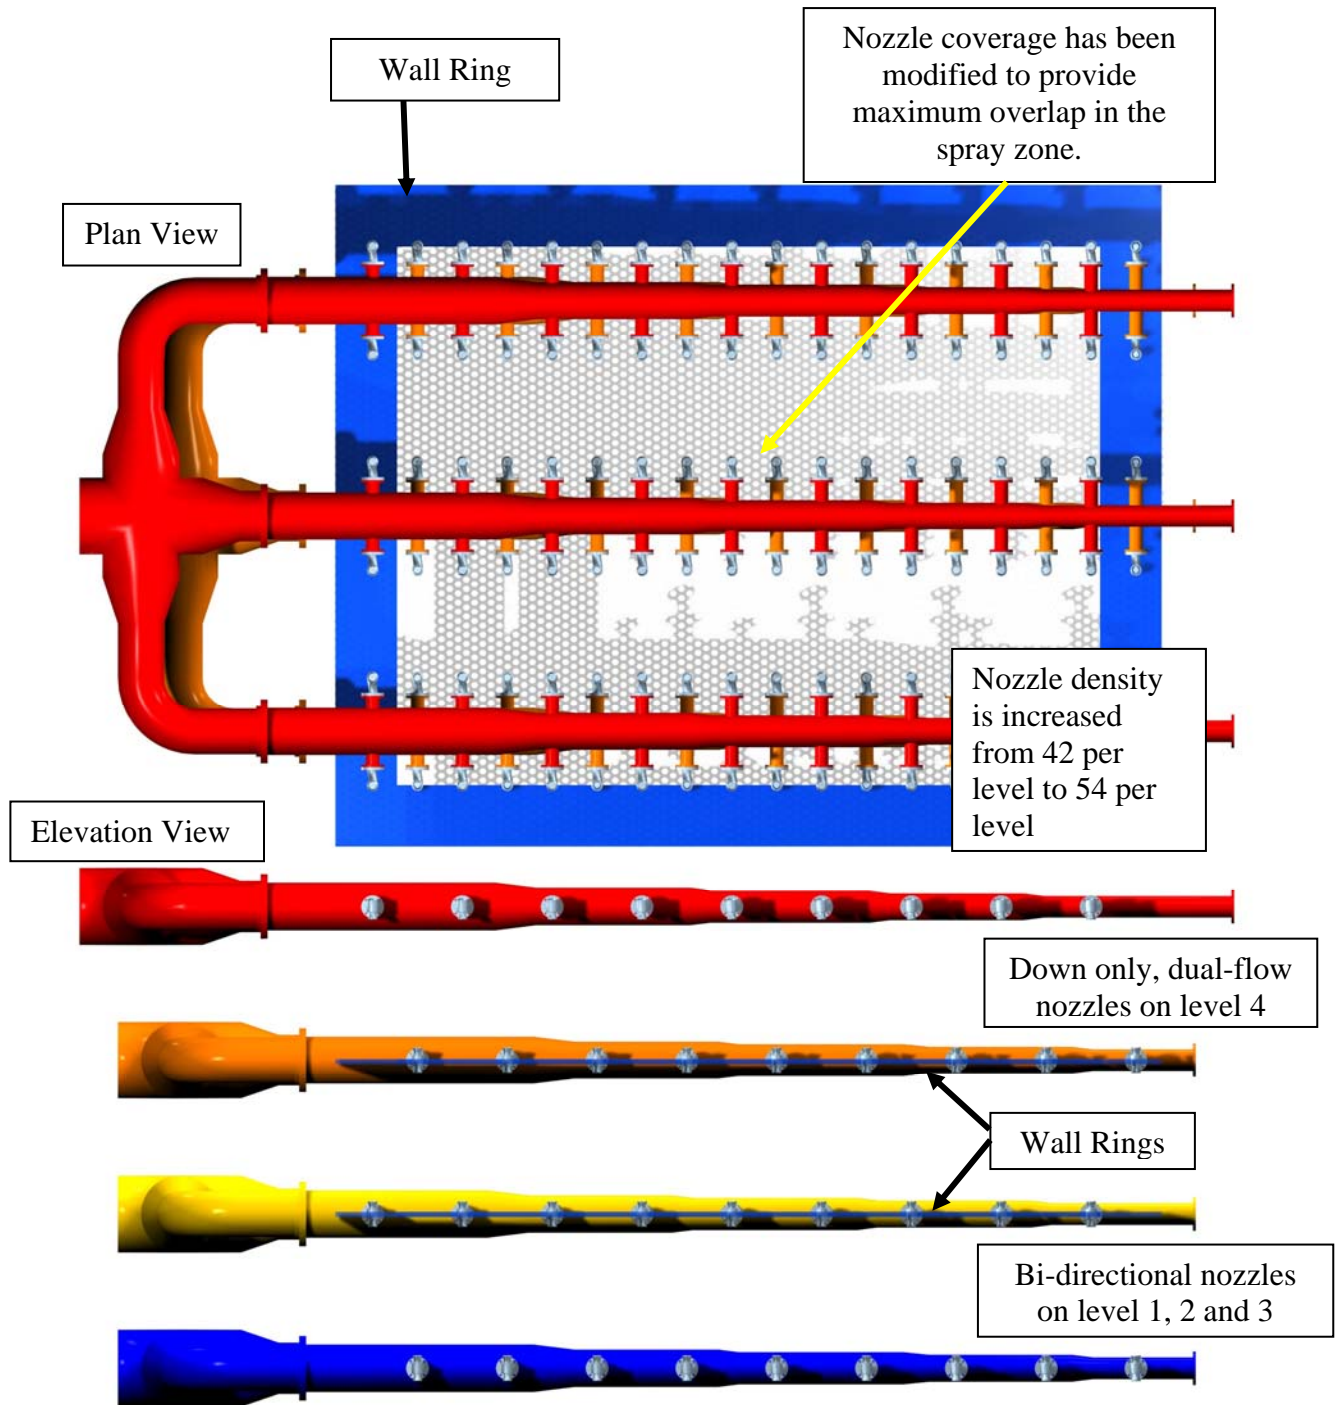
Mill Creek Units 1 & 2 Modified Nozzle Arrangement
